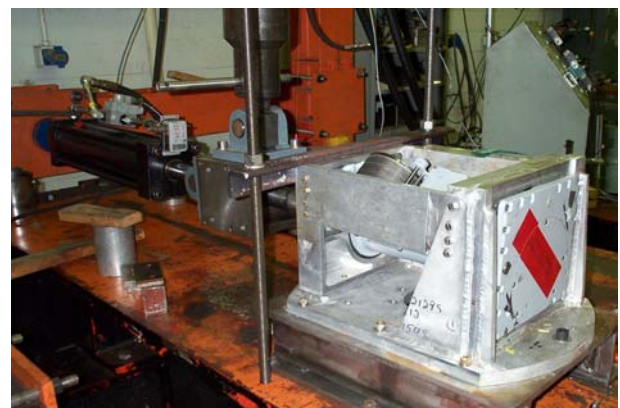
Probe and housing undergoing fatigue test in ITI's hydraulic load test cell
